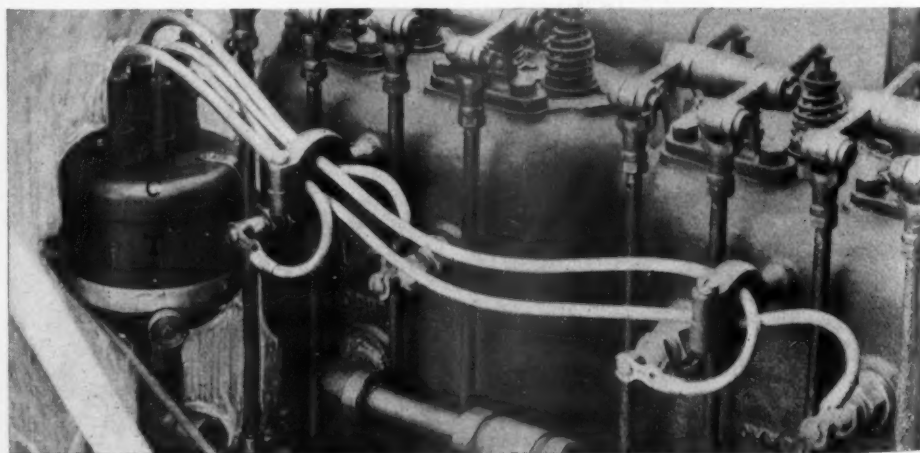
AMERICAN IGNITER ATTACHED TO MOTOR
